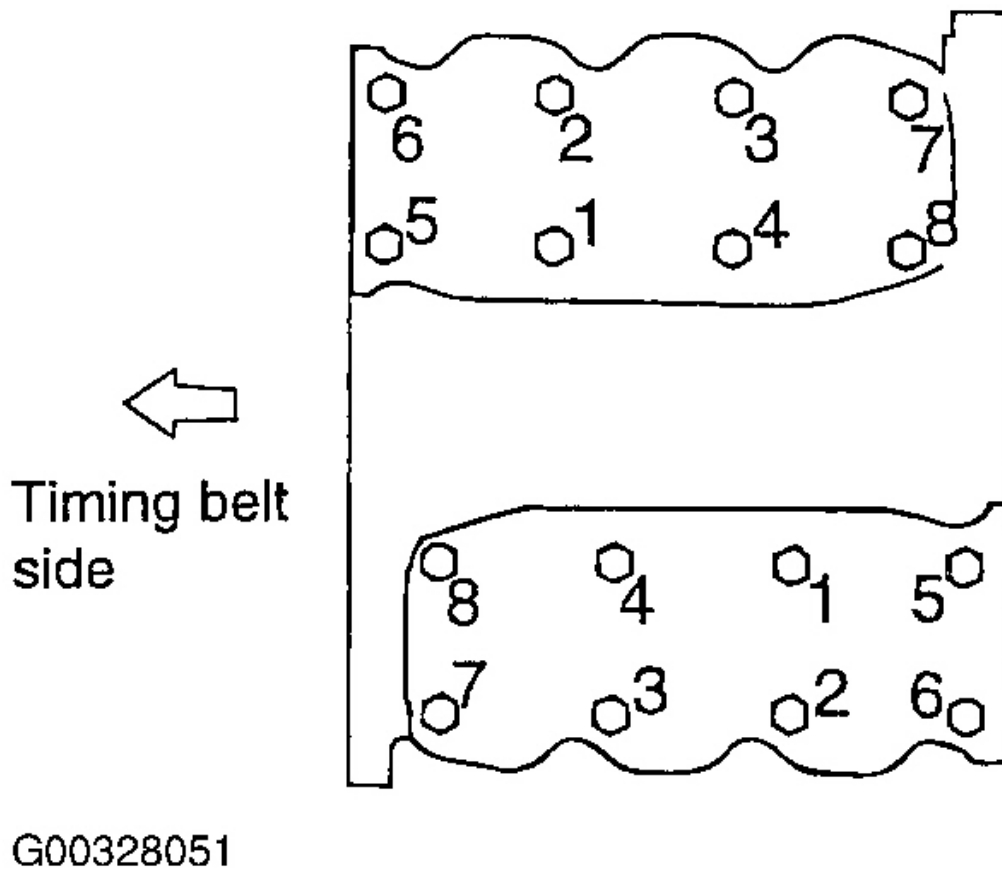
Identifying Cylinder Head Bolt Tightening Sequence
